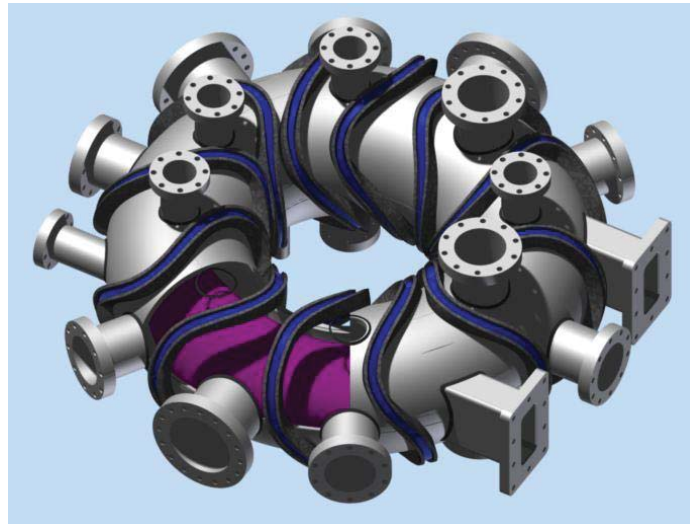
Model in 3D cad of the final version of the vacuum chamber.
